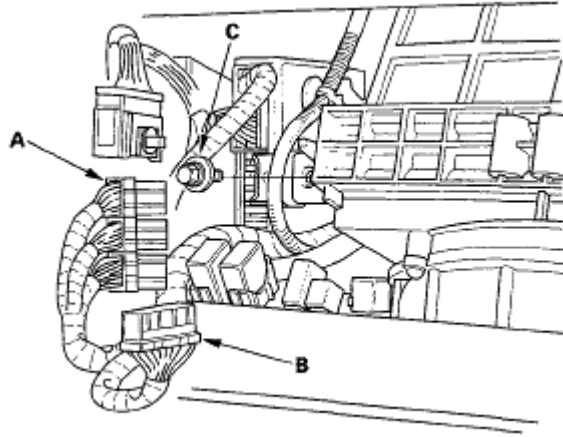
Identifying ECM/PCM Connectors And ECM/PCM Wire Harness Connector
